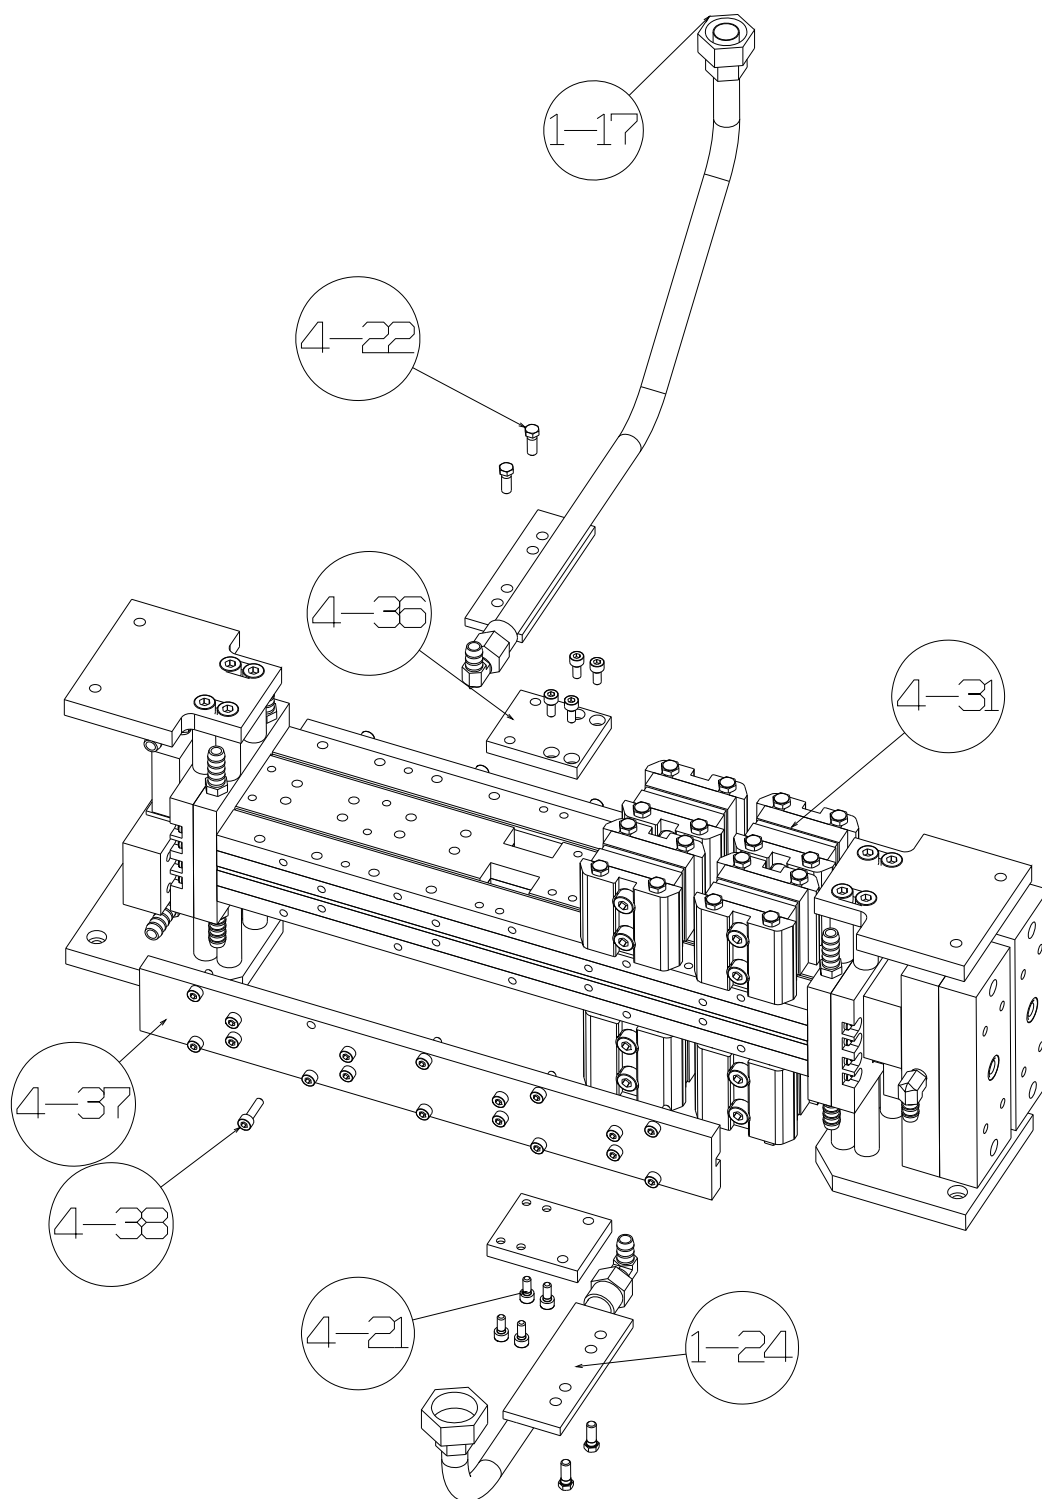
Cap. Rail assembly (Series / Parallel configuration)
